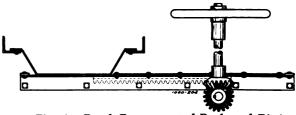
Bevel Gear operated Rack and Pinion Valve, vertical operating Shaft.
